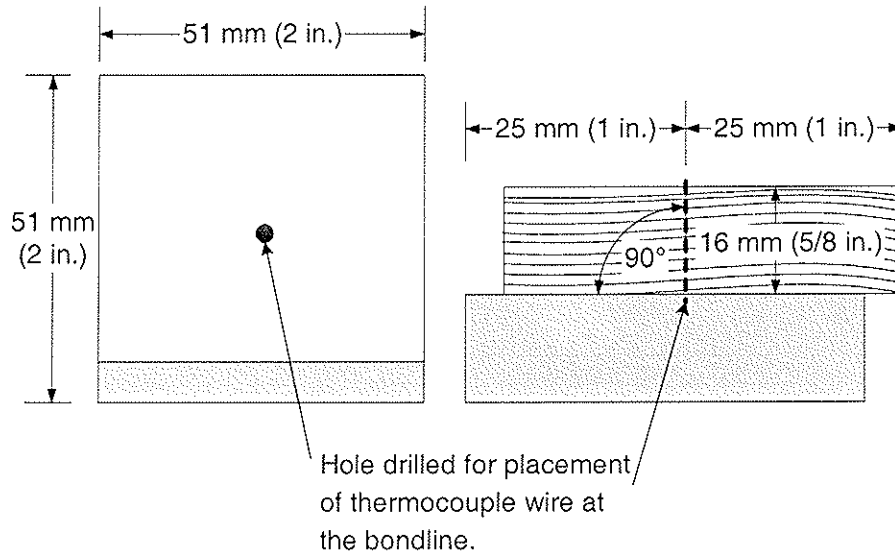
Top view (left) and side view (right) of drilled hole for thermocouple placement
